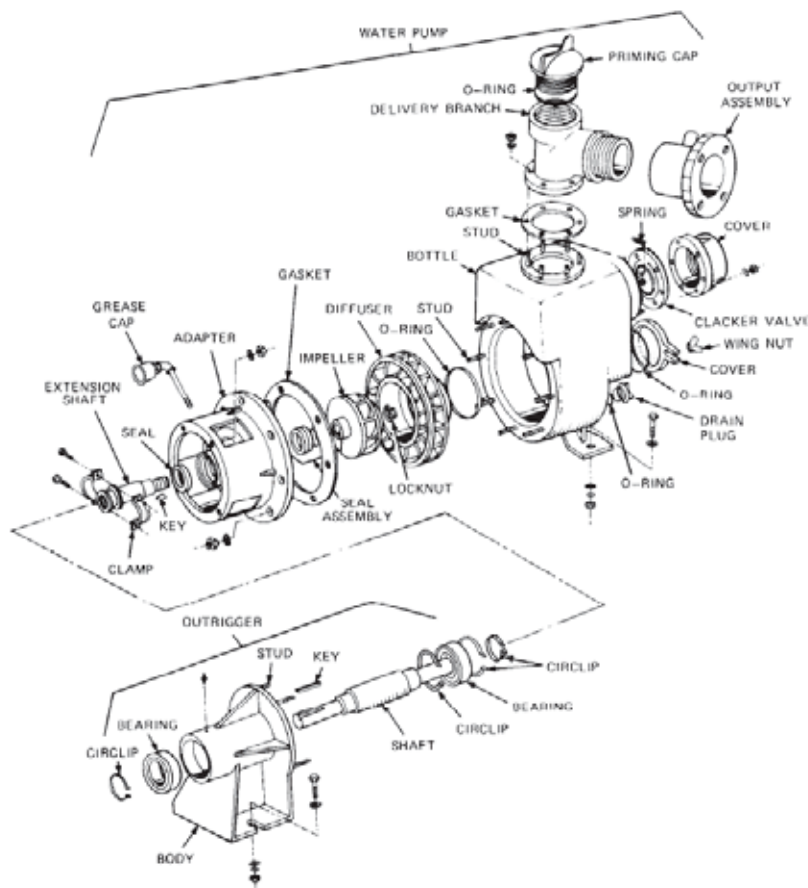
Water Pump and Outrigger Assembly – Exploded View
